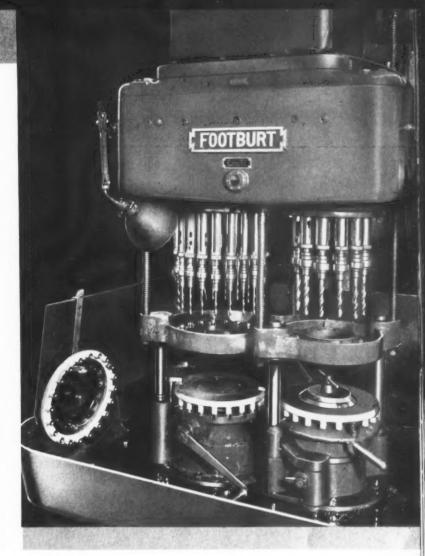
Vertical Drilling Machine Equipped with Two Multiple-spindle Heads for Drilling the Trunnions of Reduction-gear Carrier-rings and a Flange Inside the Trunnions
